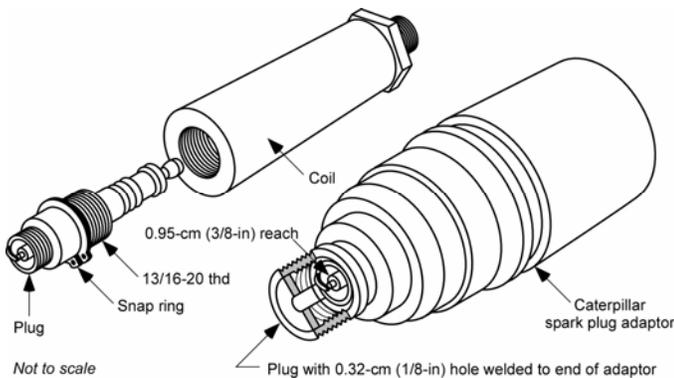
Modified spark plug with snap-ring fits a standard Fairbanks Morse coil. A Caterpillar spark plug adaptor with a plug welded to the end forms a shroud chamber around the plug electrodes. (Courtesy of F. E. Lynch)
